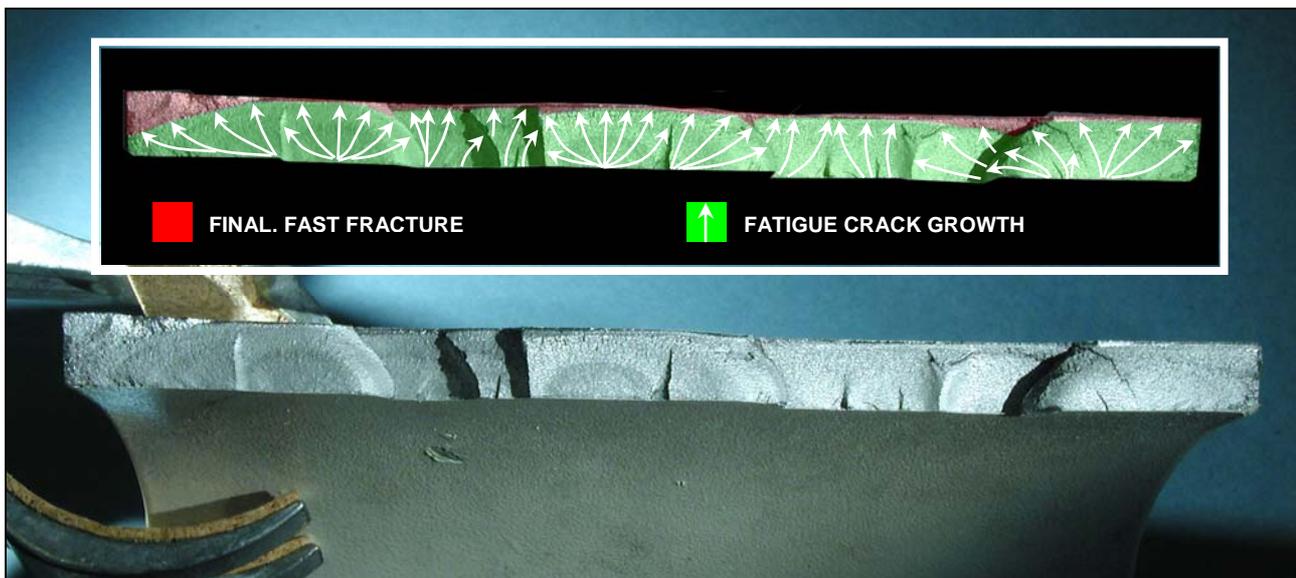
Close view of the fracture surface, prior to sectioning. Numerous fatigue crack fronts were evident, each of which had initiated on the concave surface of the spring. The inset shows the directions and extent of fatigue crack growth.
